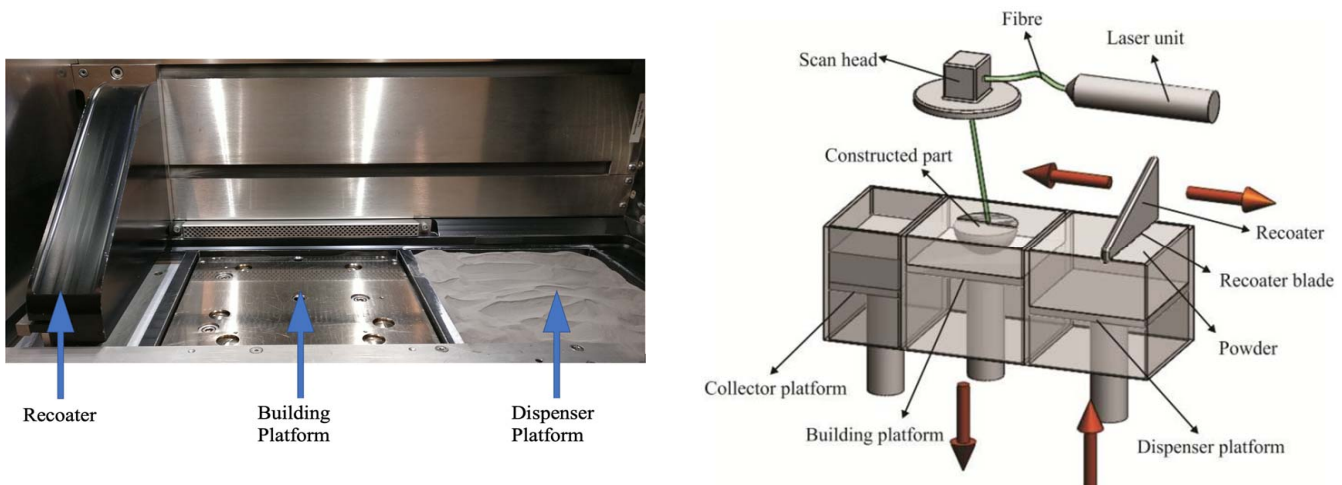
Photograph of working chamber of DMLS machine and principal scheme of the process [21].
